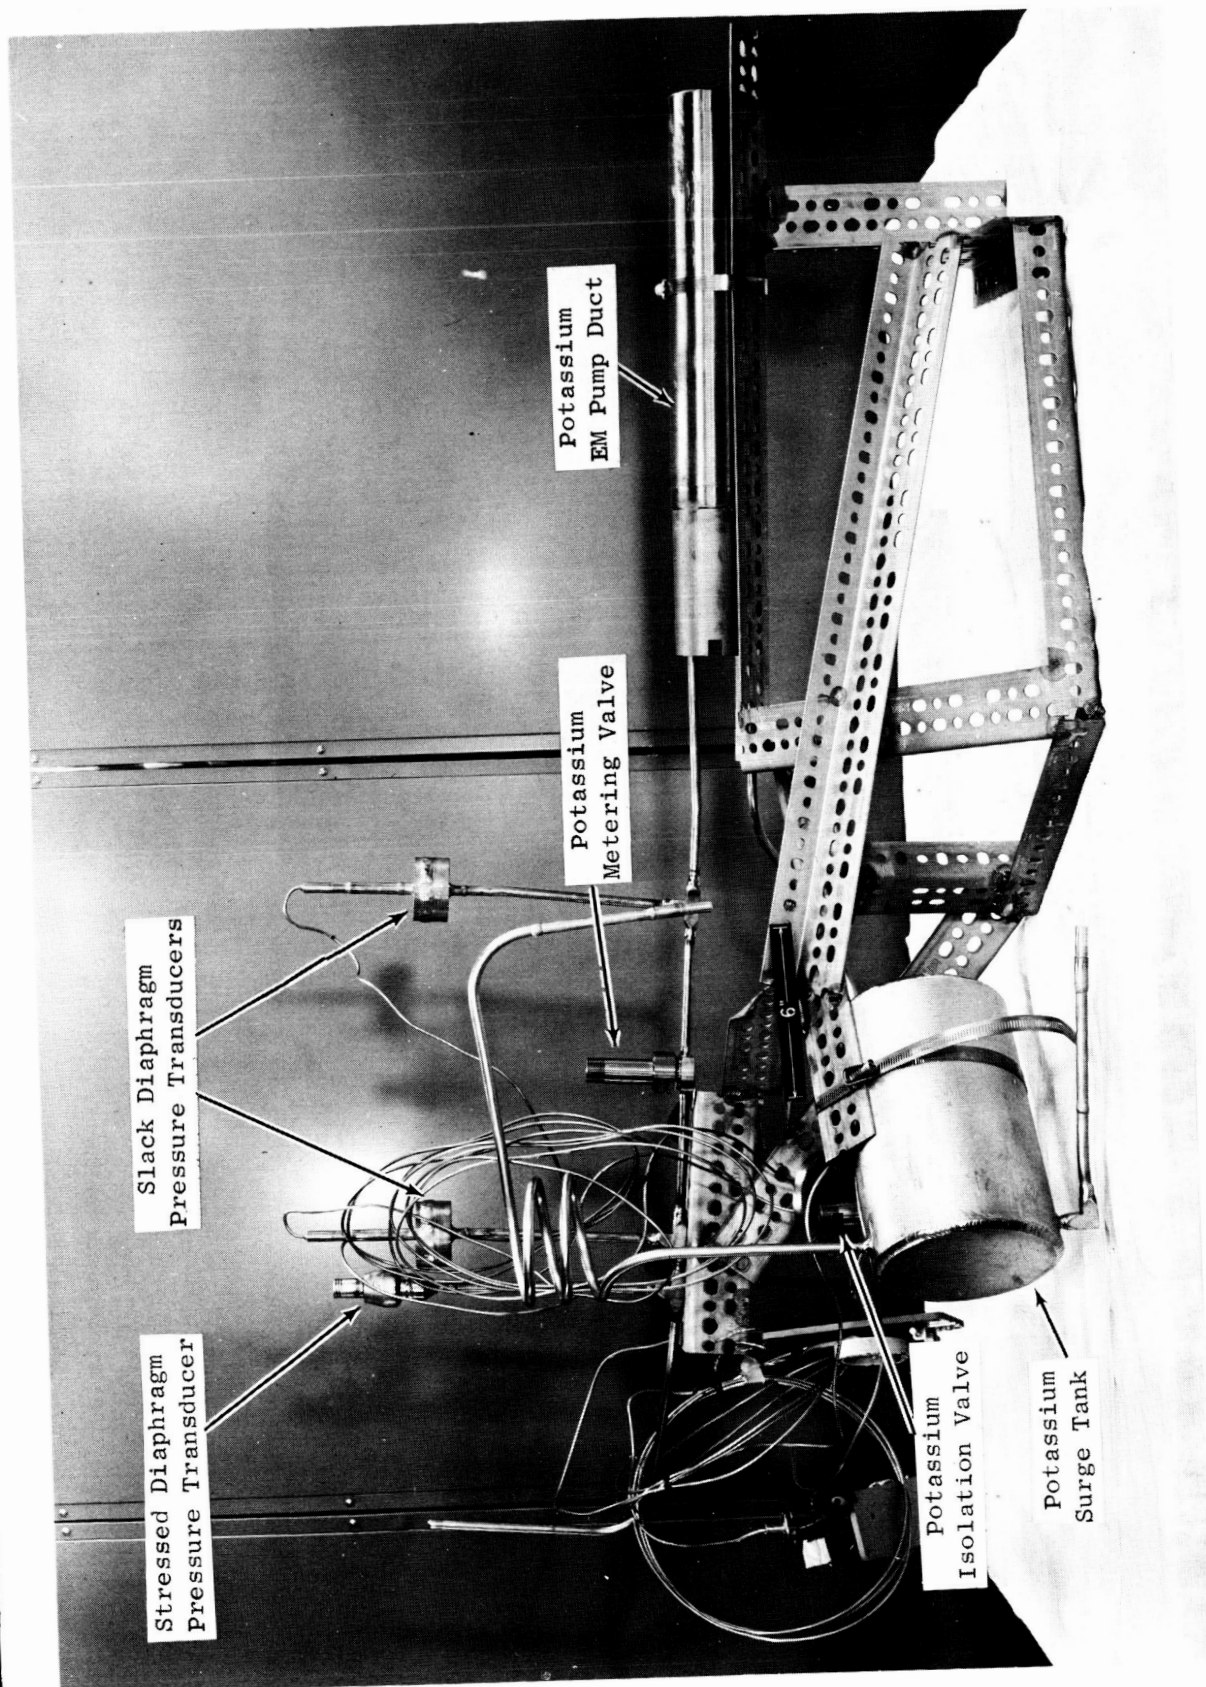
Potassium surge tank and EM pump subassembly of T-111 corrosion test loop mounted on welding fixture.
